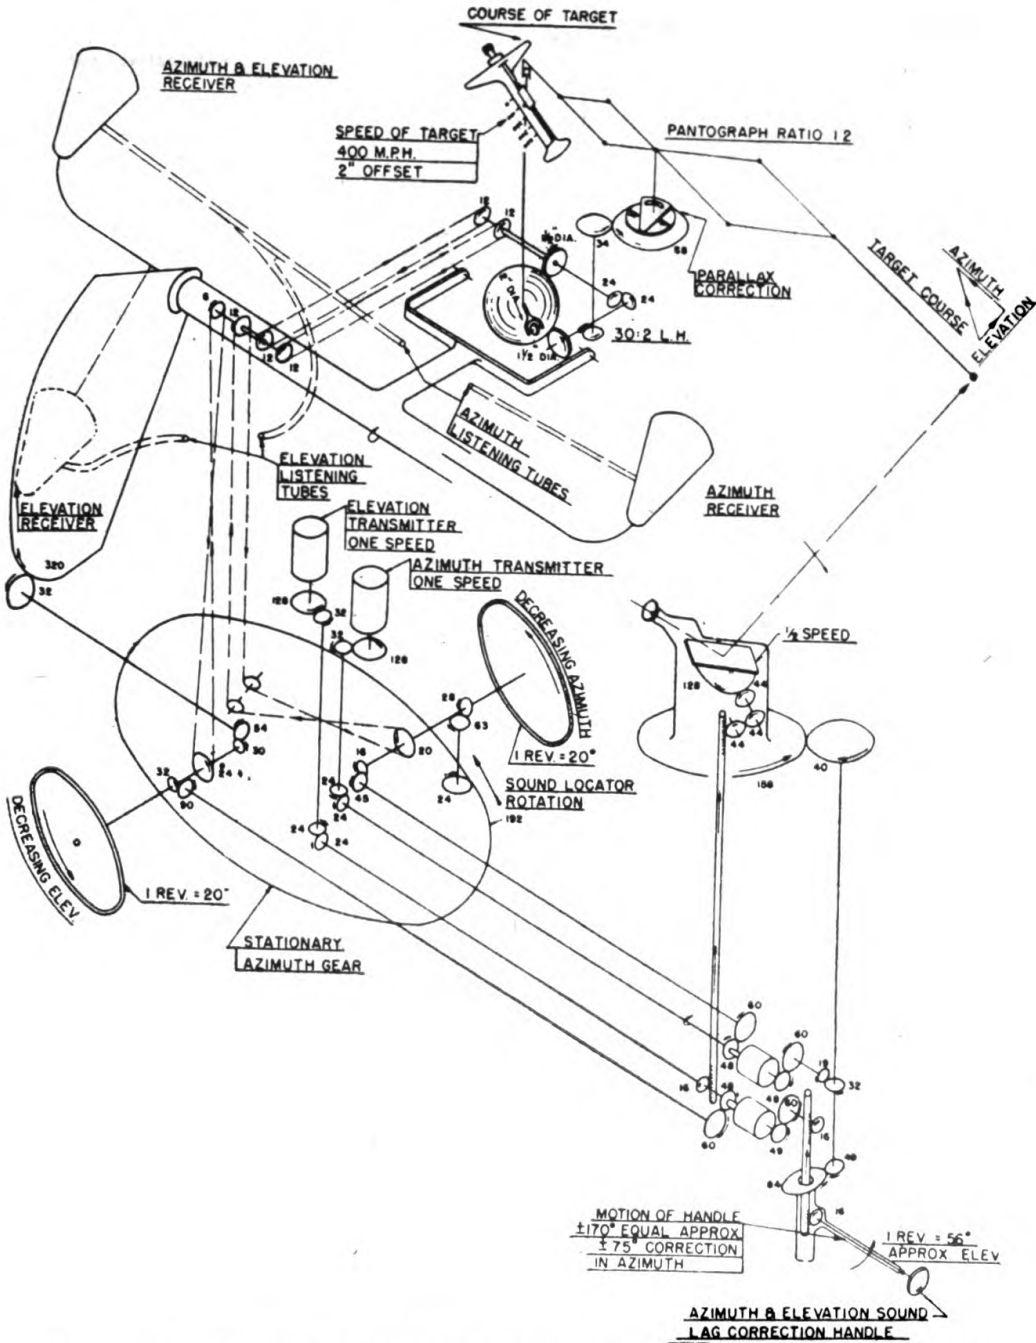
SCHEMATIC GEARING DIAGRAM (Sperry drawing No. 644030-A).
